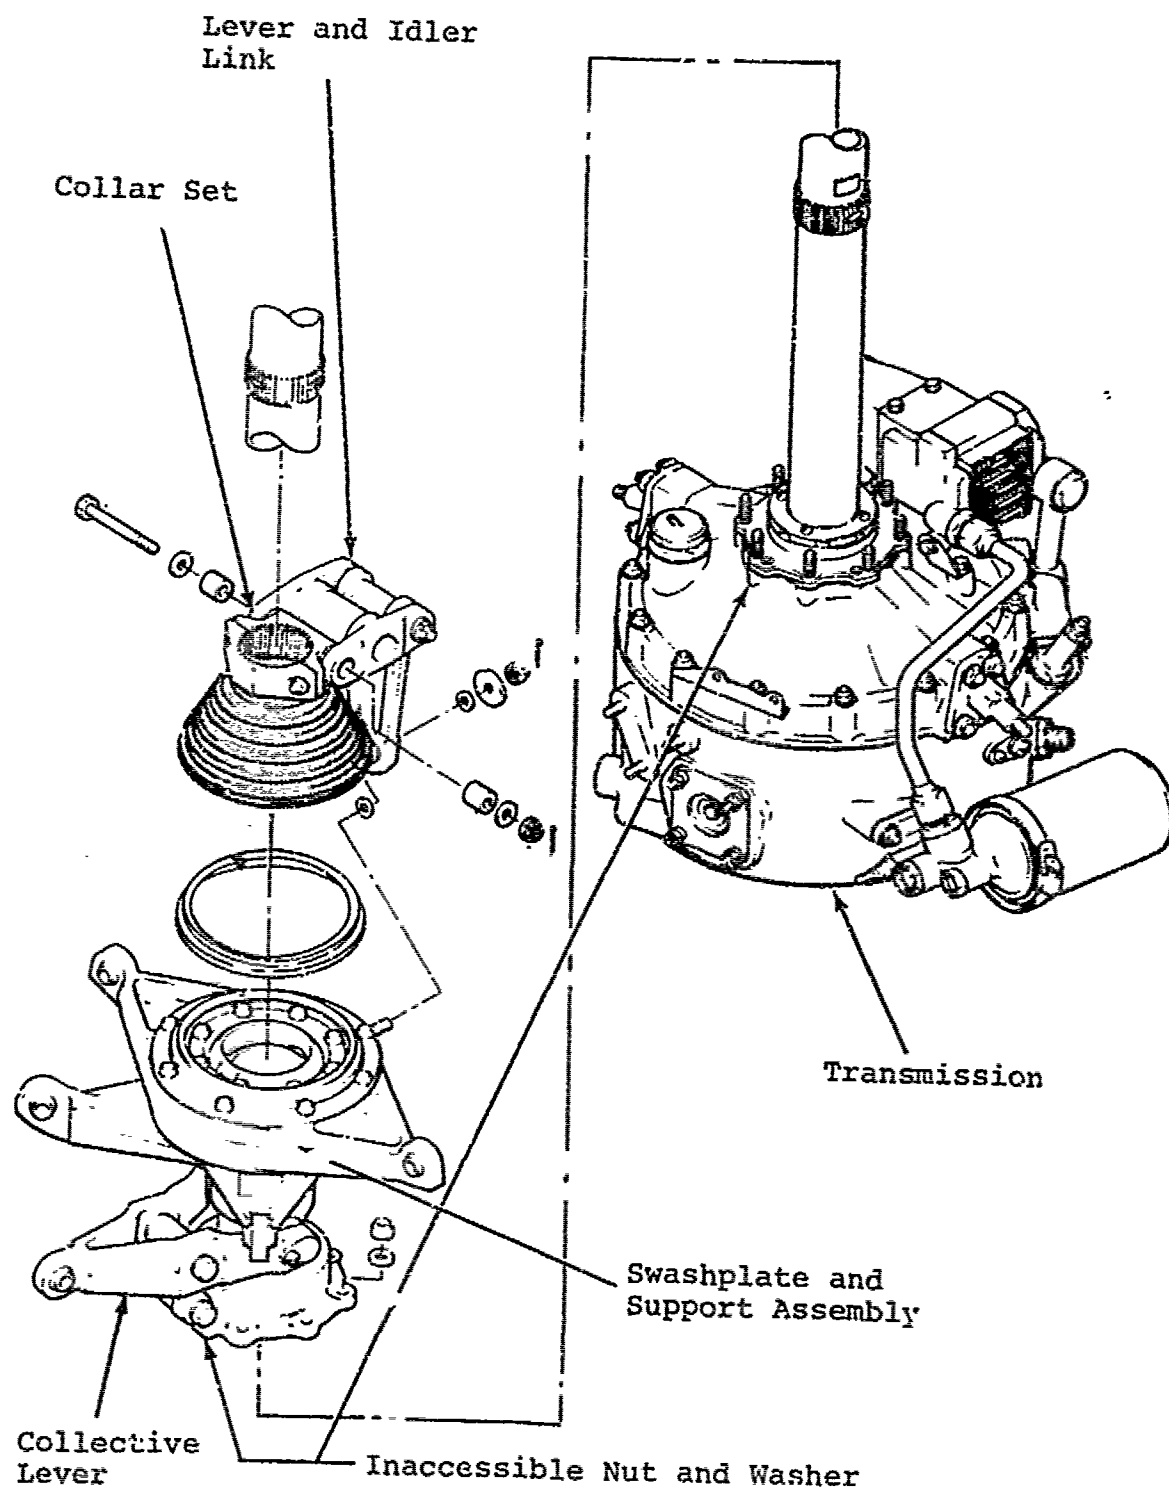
Swashplate and Transmission Assembly, OH-58 Helicopter.
